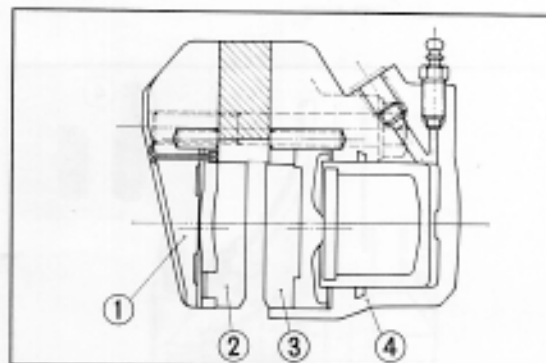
① Caliper B ② Pad B ③ Pad A ④ Caliper A
